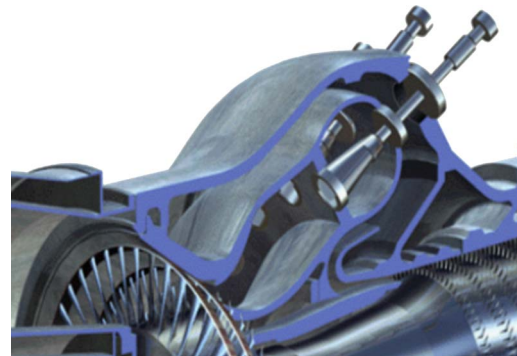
Engine integration of the annular single row combustor in the GT8C2
